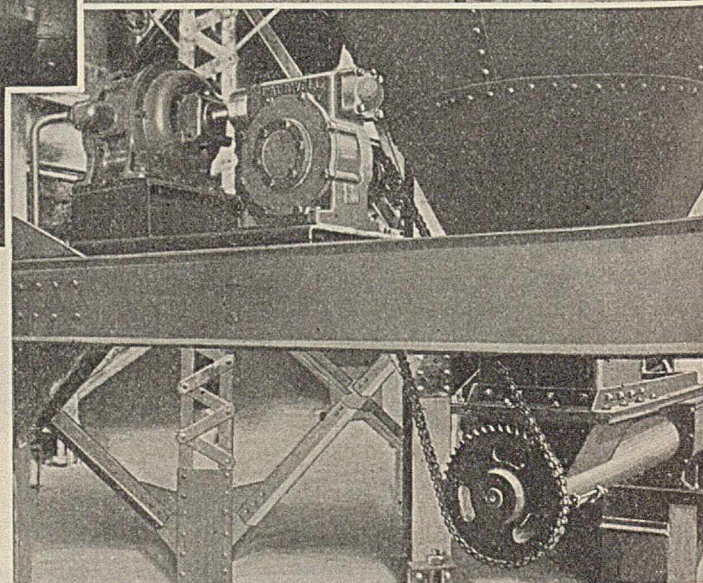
(RIGHT). WORM-GEAR REDUCER AND ROLLER CHAIN DRIVING A SCREW FEEDER IN TUBULAR HOUSING FOR HANDLING PULVERIZED LIME
